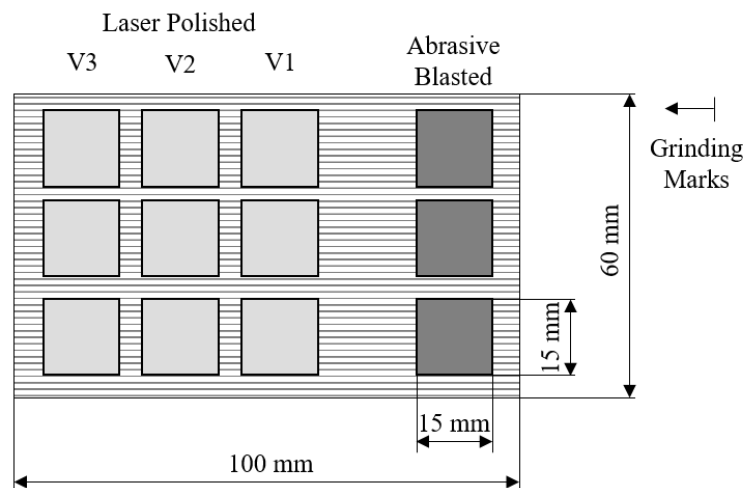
Layout of the examined plate made of tool steel S390 microclean 63+2 HRC with surface
